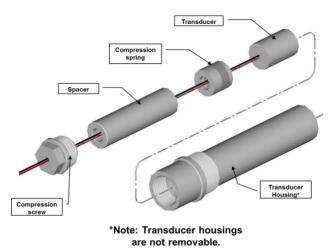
Transducer Assembly Construction (shown components are for 1.0 inch housing)
